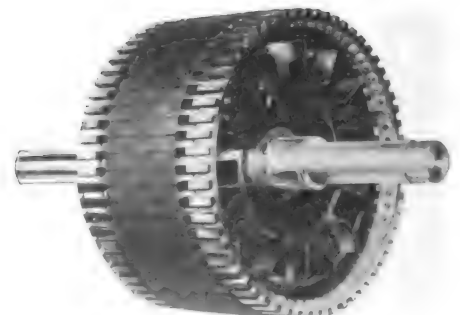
ROTOR OF TYPE CCL MOTOR.
